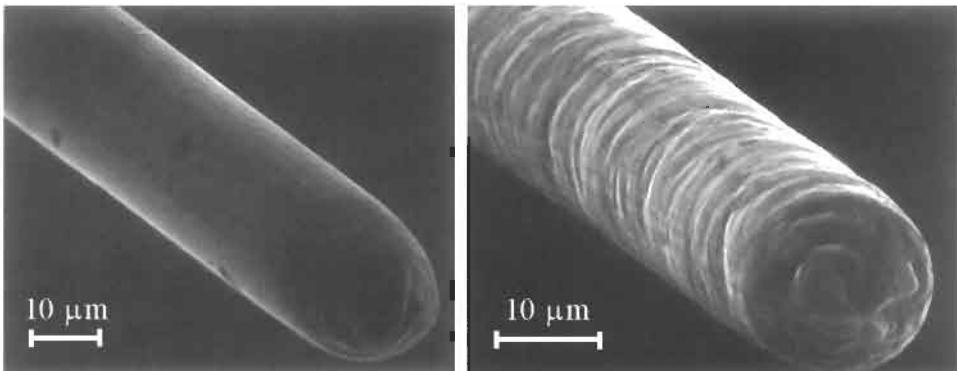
Wire and fracture surfaces of 25 μm diameter Au wires. Left: as-drawn with smooth surface and almost no elongation at rupture. Right: annealed at 300°C with rough surface indicating begin of strain localization.
